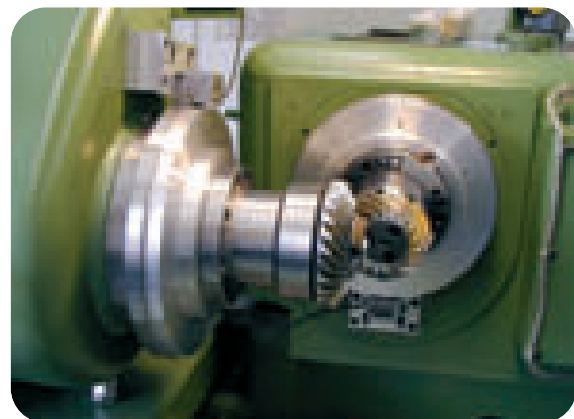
Close-up of a gearset showing contact image patterns on the tooth surfaces.
